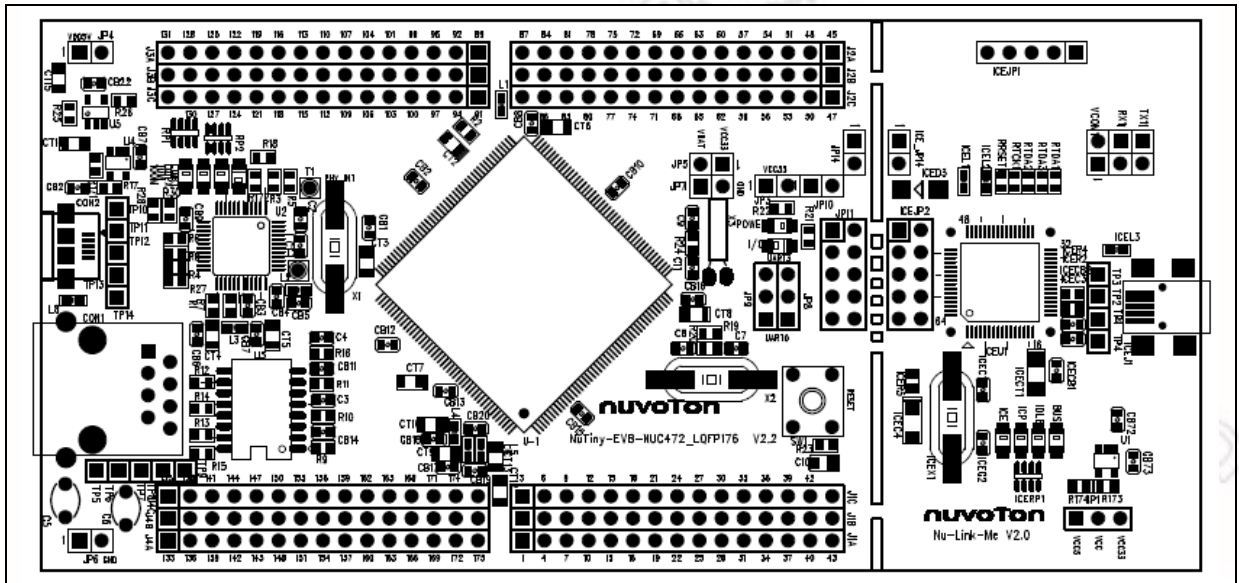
NuTiny-SDK-NUC472 PCB Placement
